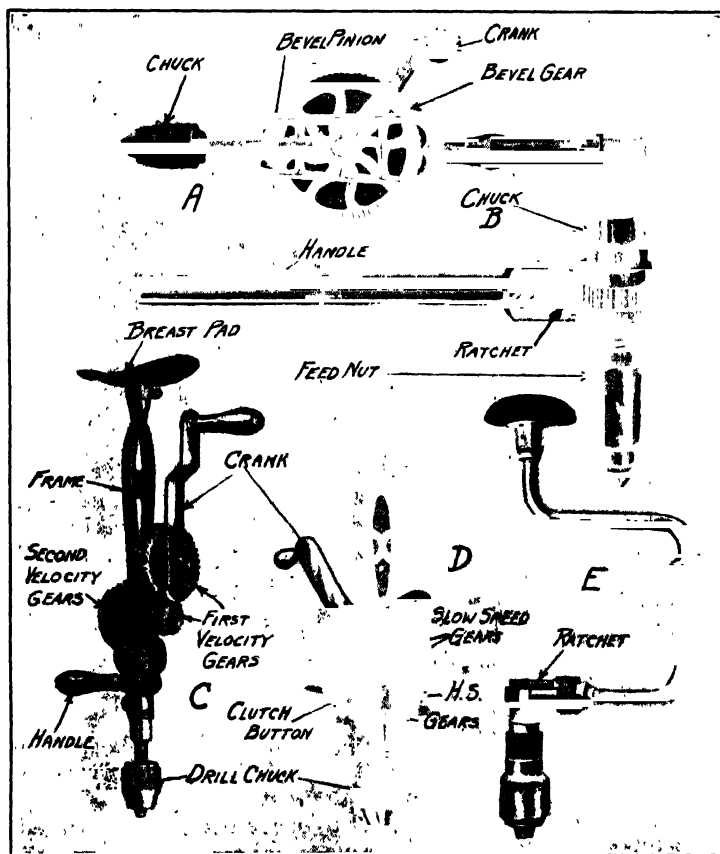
Forms of Hand Operated Drilling Machines. A—"Eggbeater" for Small Drills. B—"Old Man" or Ratchet Drill for Heavy Work. C and D—Breast Drills. E—Carpenter's Bitstock for Boring Holes in Wood.
